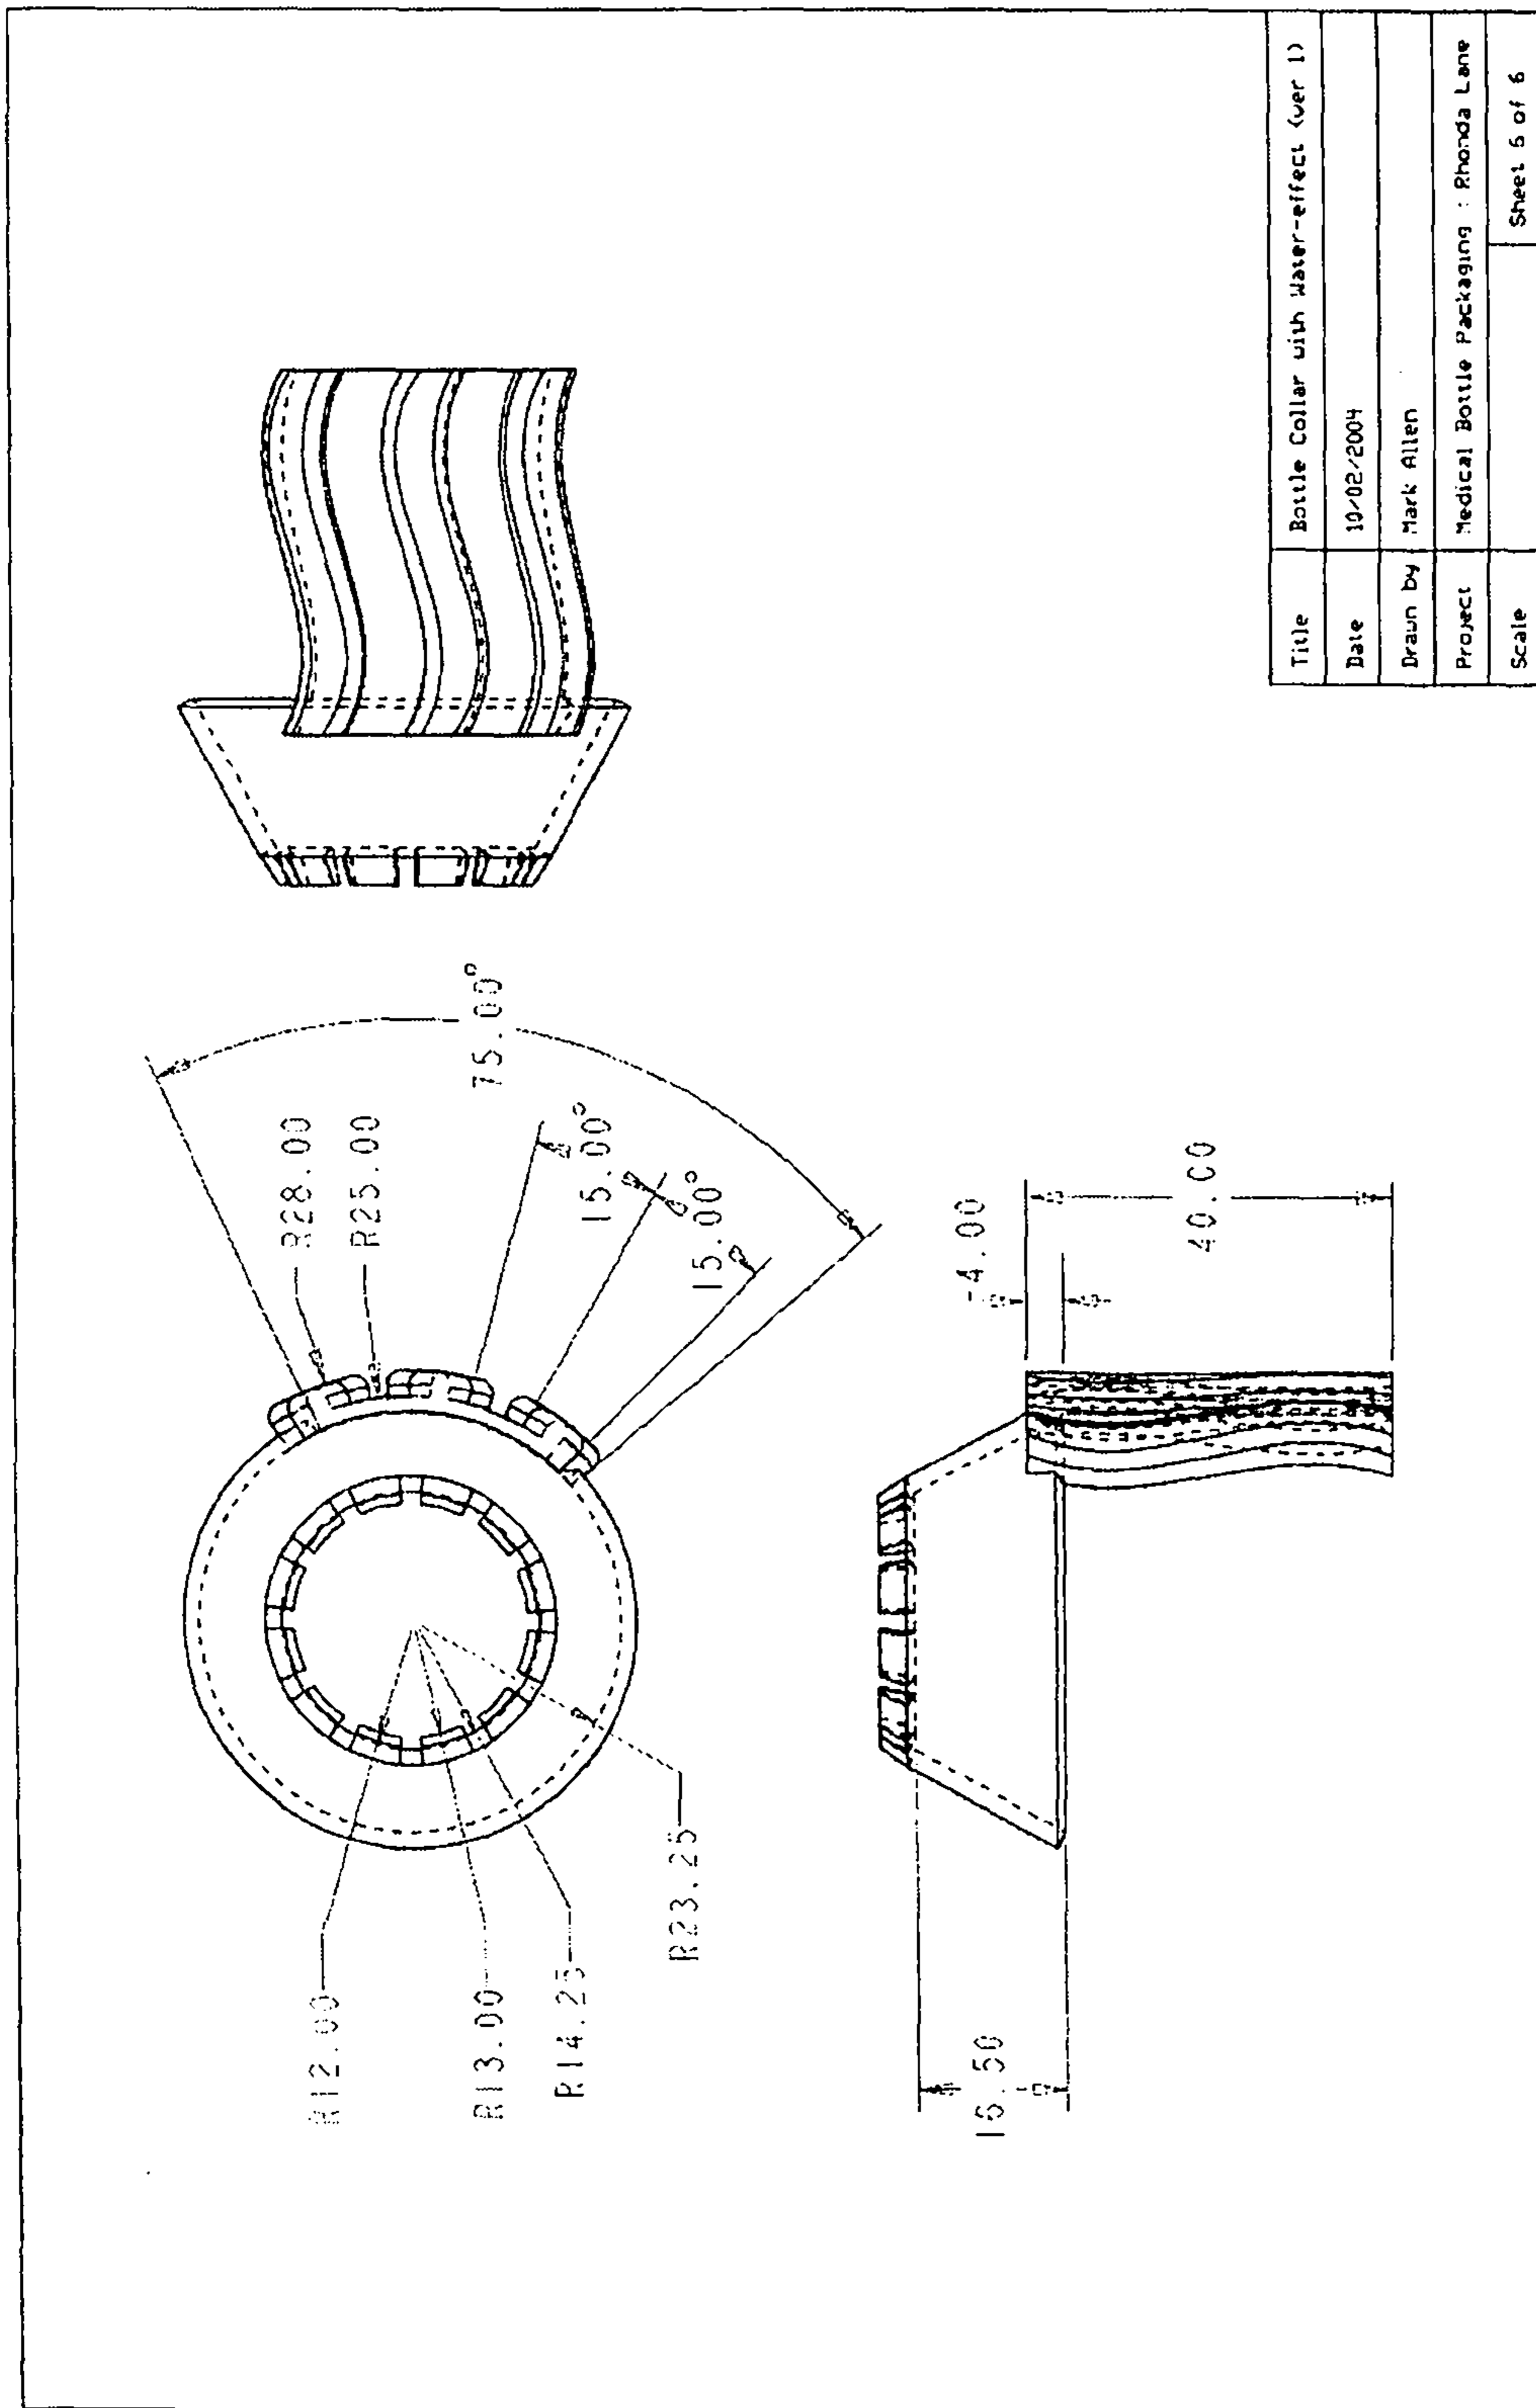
Pro- Engineer drawing of the drug identification collar with the haptic feature representing diuretic (fluid regulating) drugs
